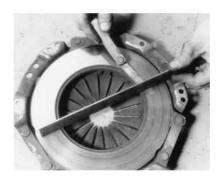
Be sure that the flywheel surface is clean, before installing the clutch
